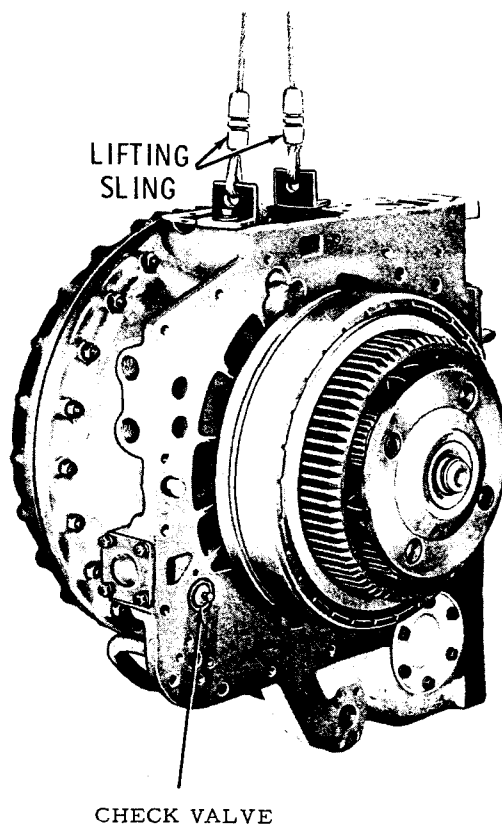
LOCATION OF OUTPUT PUMP CHECK VALVE IN CONV. HOUSING
